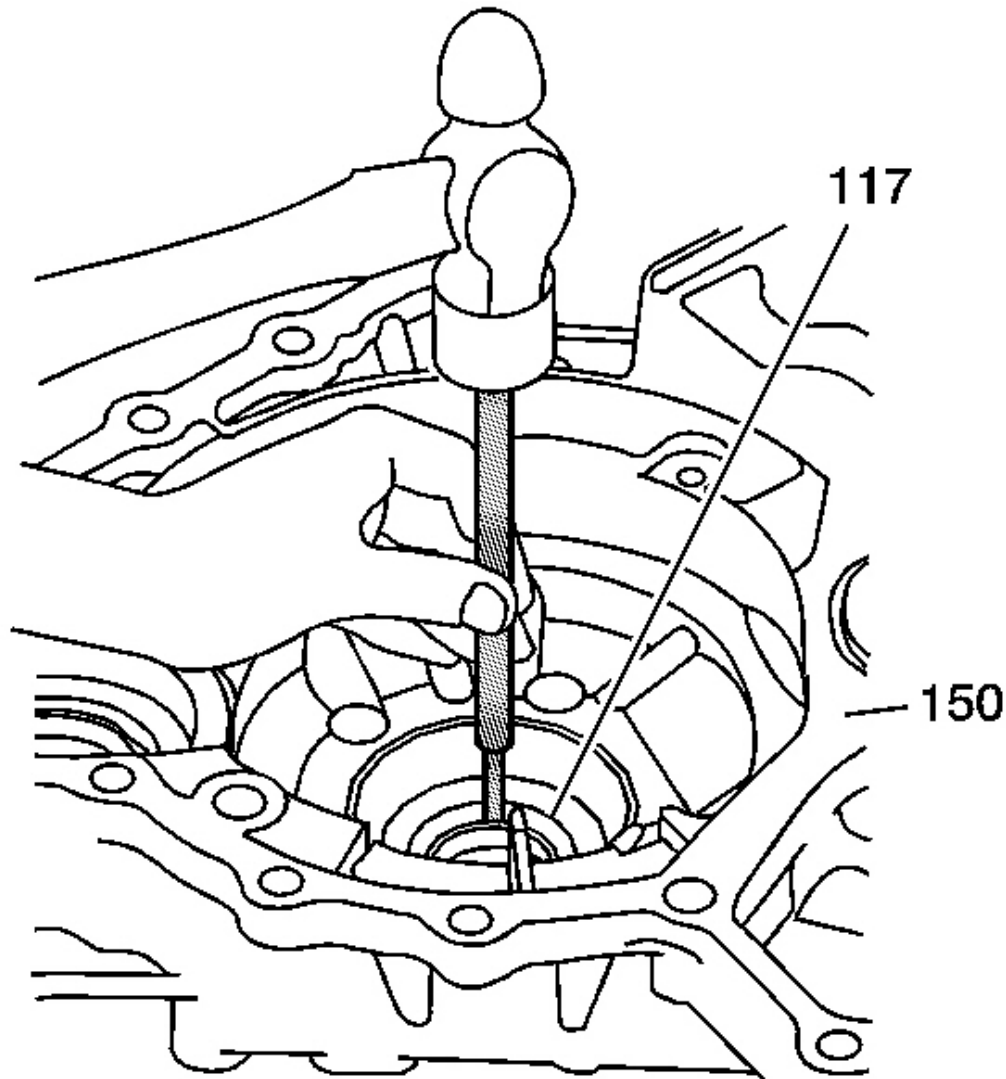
Removing Front Wheel Drive Shaft Fluid Seal From Torque Converter Housing Using A Hammer & Punch
